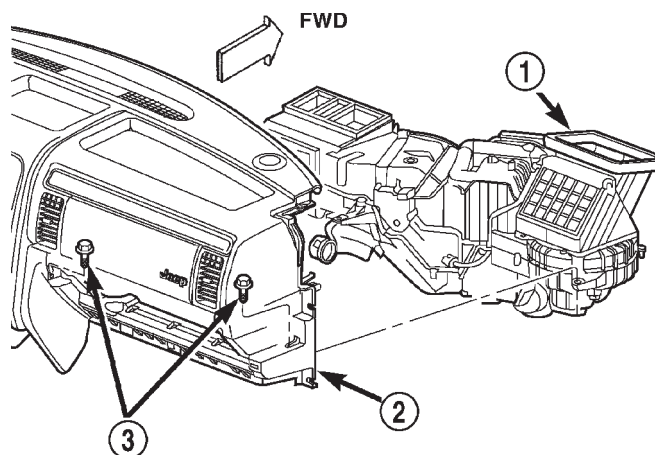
Passenger Side Instrument Panel to Heater-A/C Housing Mounting
